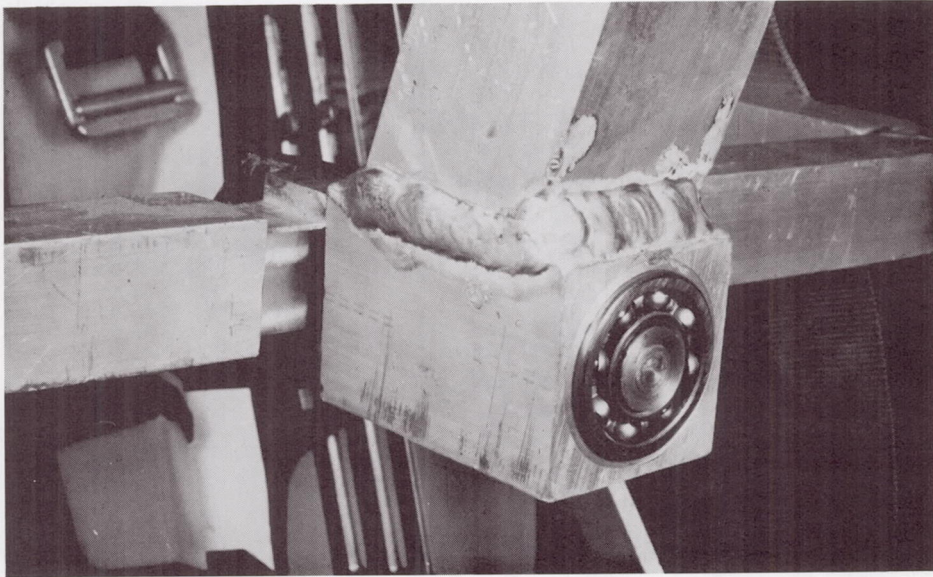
Prototype Harness: Rear Bearing Pivot Point
